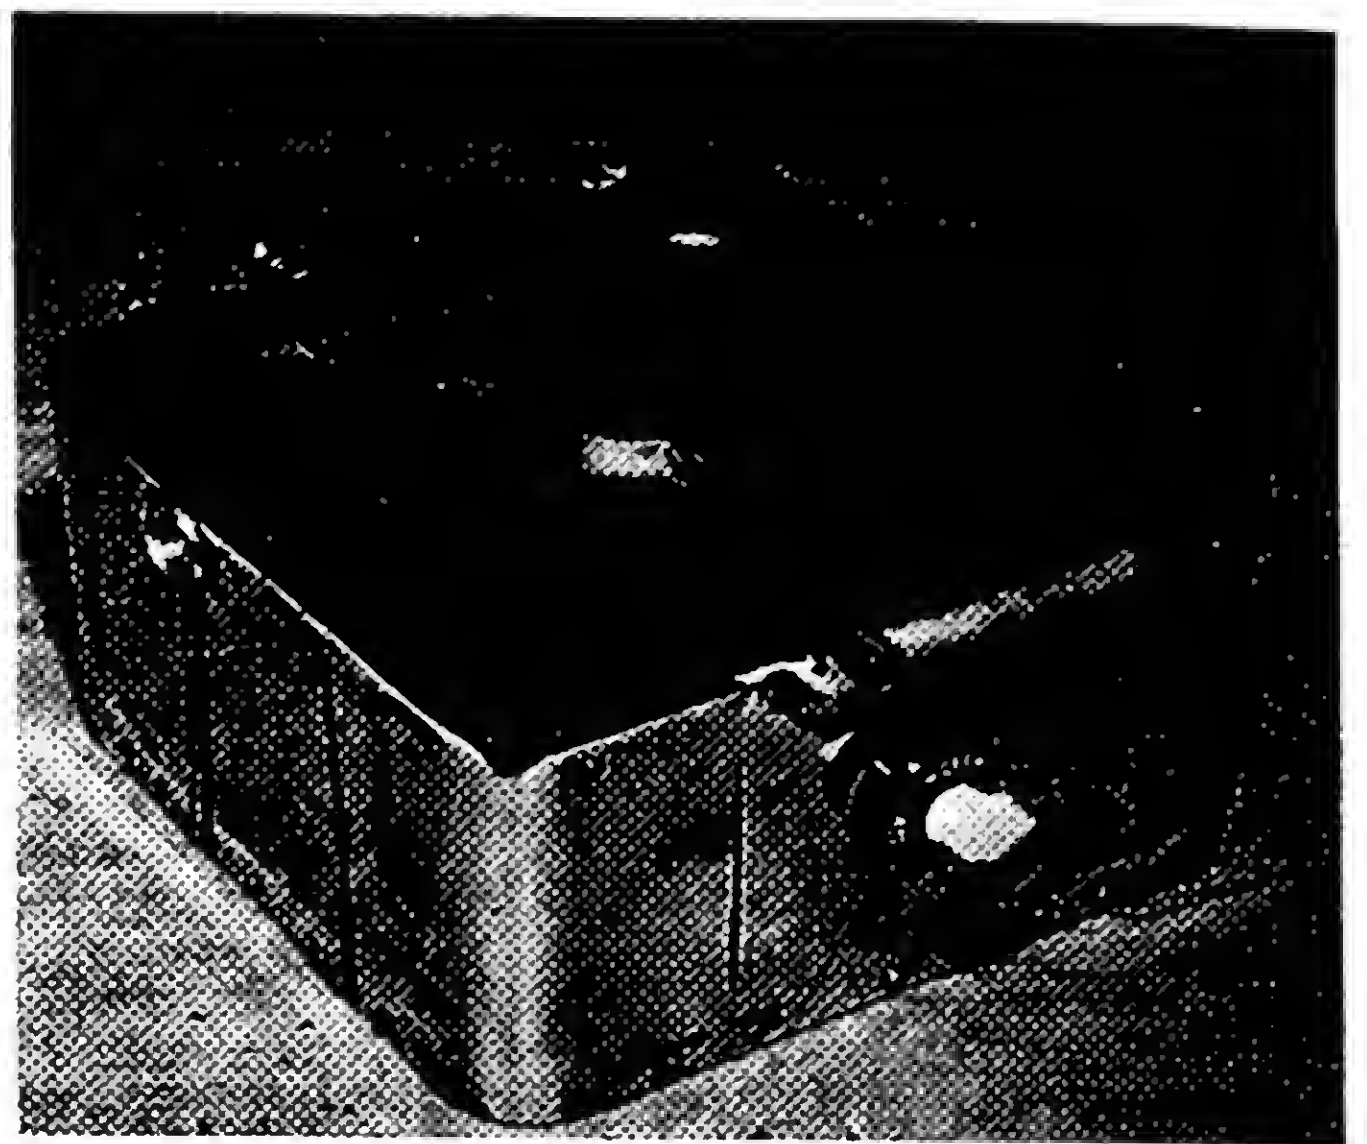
Fixture in closed position with vacuum applied. Note pressure exerted against aluminum mold during curing cycle. Fixture is electrically heated.
